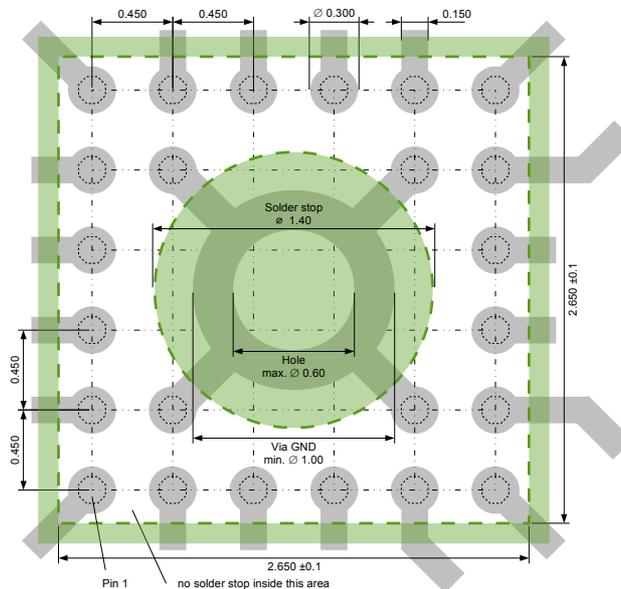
Example of a recommended, balanced fine-line PCB design for epc600
